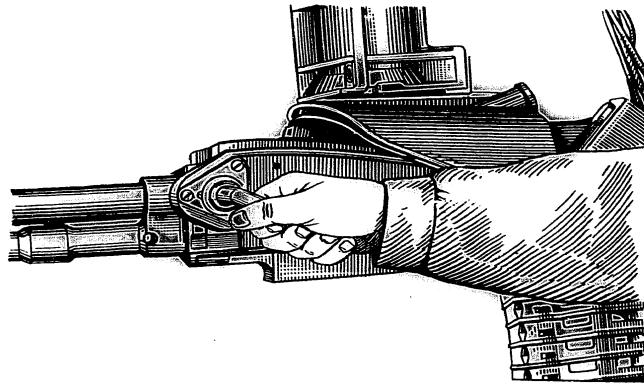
Using Socket Wrench Turn Right- and Left-Hand Nuts of Front Attachment Fitting through 180°
